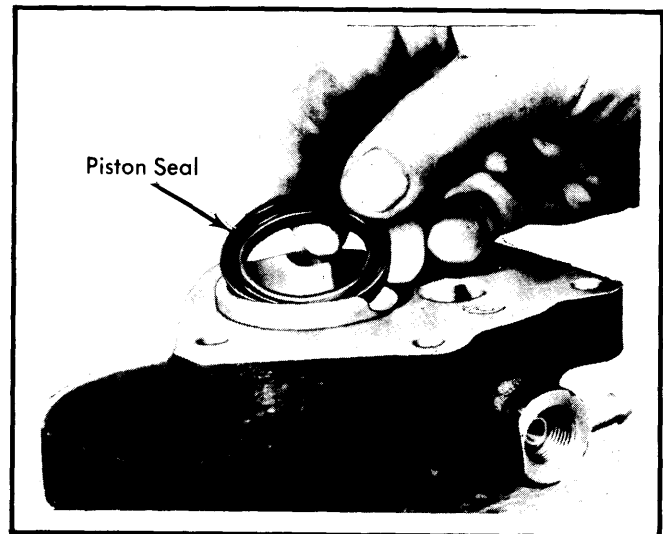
Installing New Power Piston Seal into Rear Housing (Cadillac Shown)
